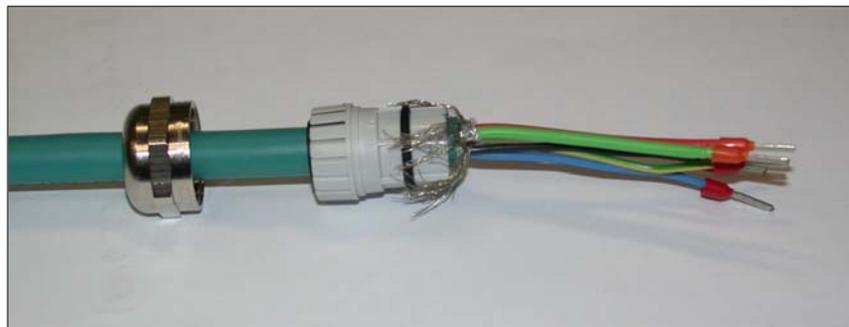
Example: Pre-assembled cable for PROFIBUS
